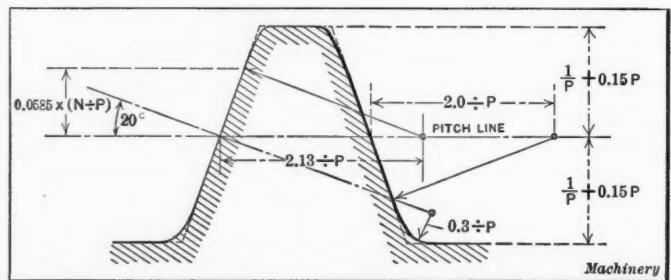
Hob Tooth for generating a 20-degree Involute Milled Tooth
